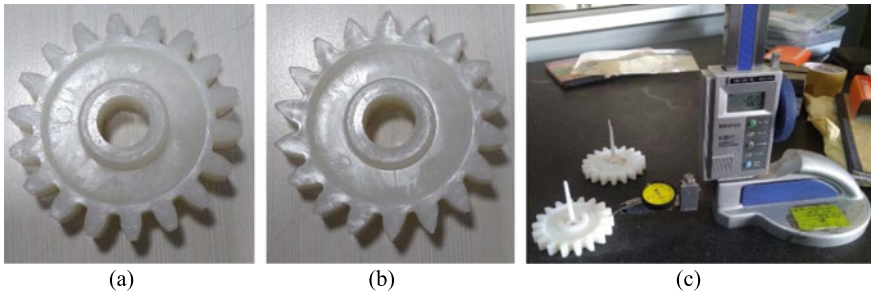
Finished gears: a standard gear. b Asymmetric gear. c Measurements of lateral surface of gear on height gauge
